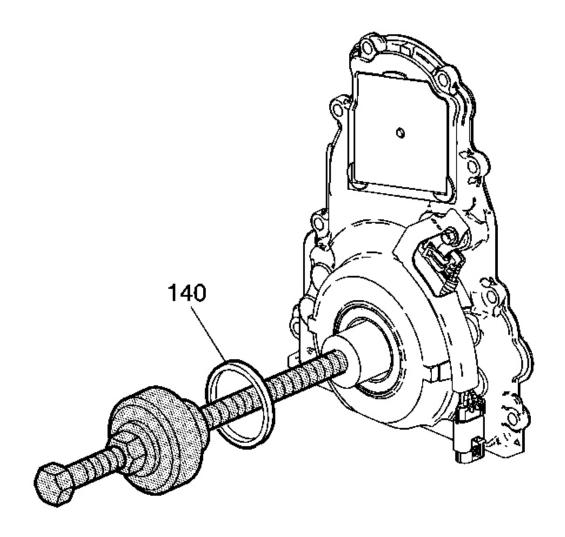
Installing Crankshaft Front Oil Seal Courtesy of GENERAL MOTORS CORP.
